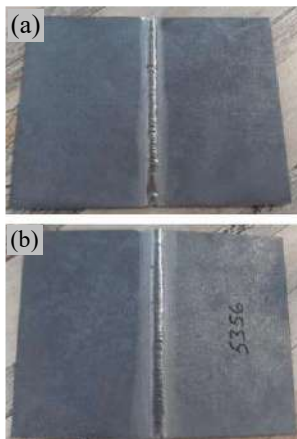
Image of the TIG welded samples, (a) AA4043 and (b) AA5356.
